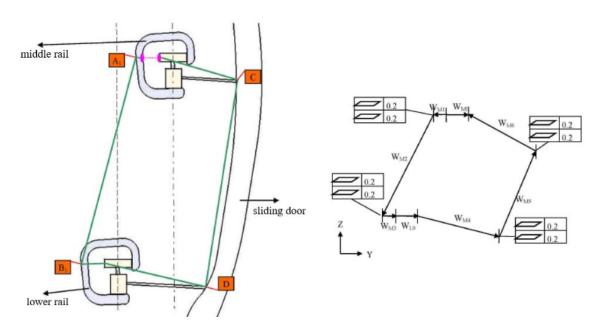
Fitting state(left) and dimensional chain with GD&T(right) in Y axis (middle
